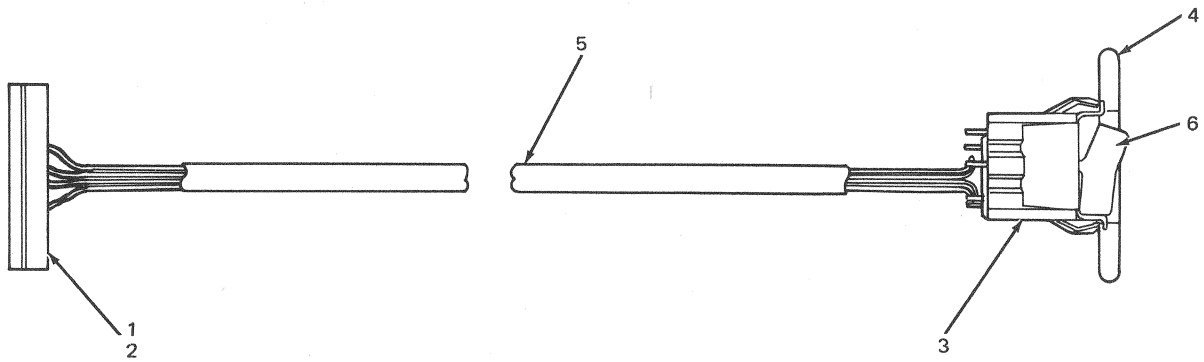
CL8 Unit Assembly (Sheet 3 of 3)
